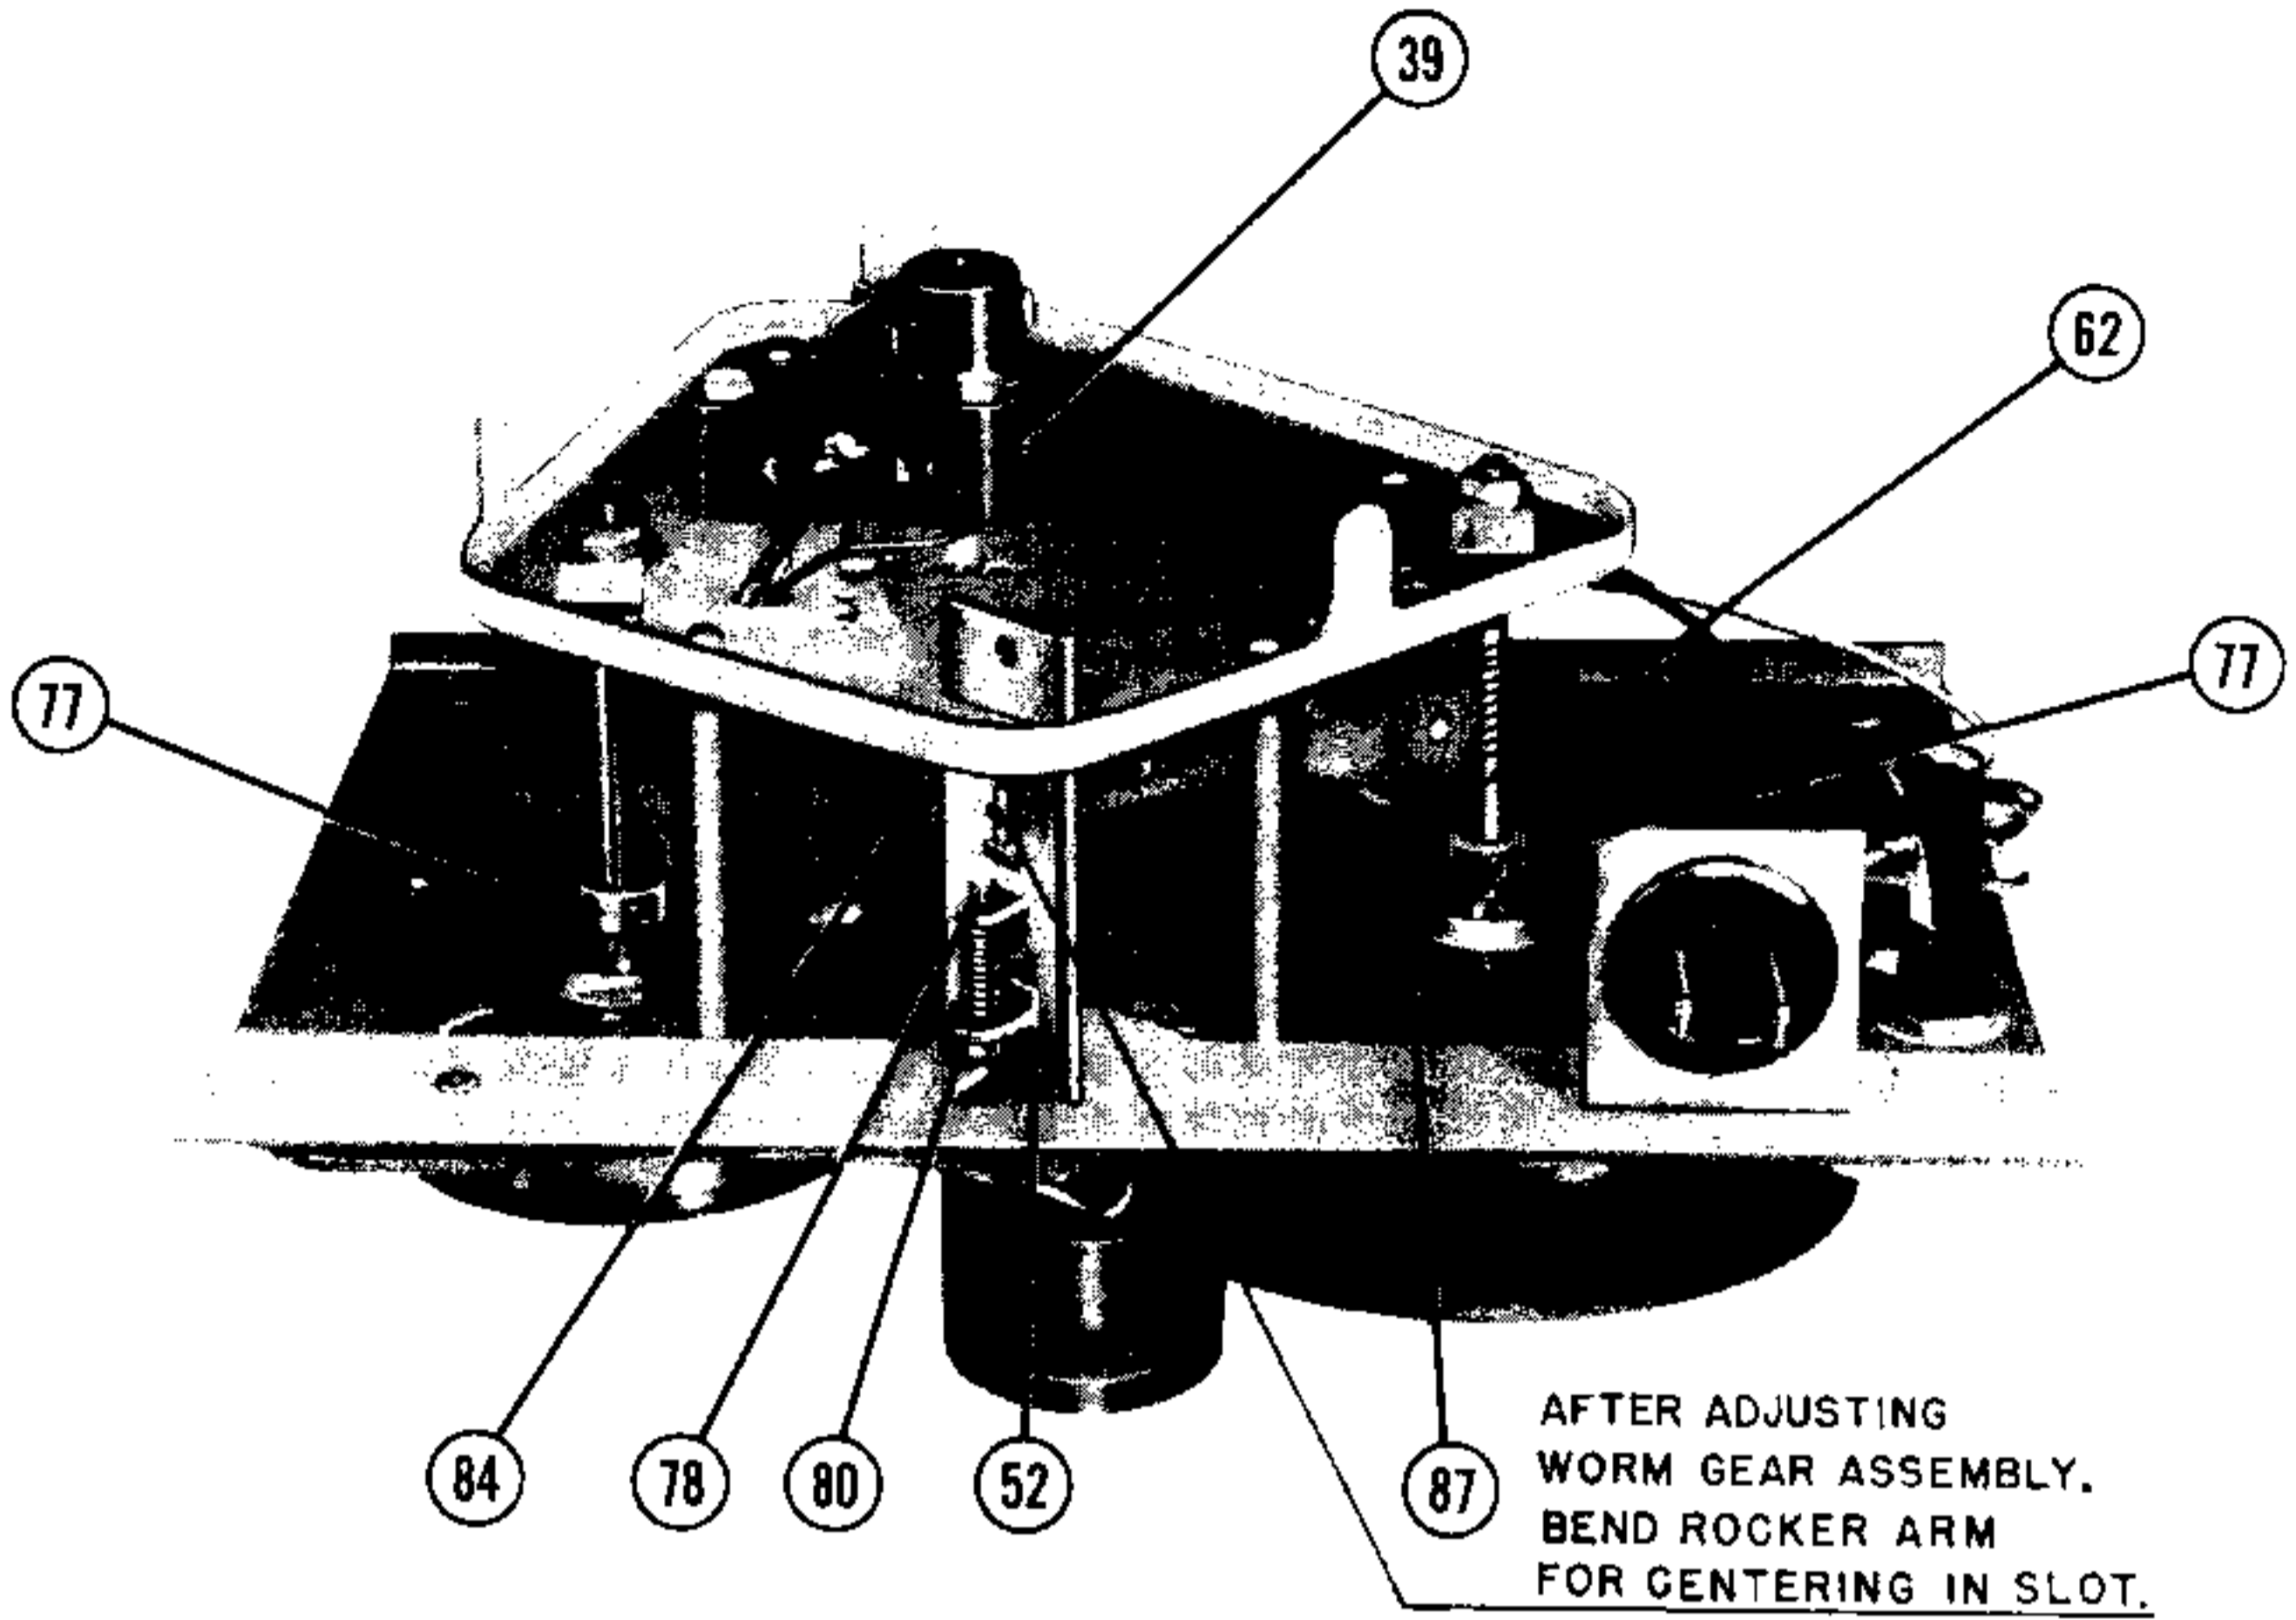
REAR VIEW — DRIVE MECHANISM
